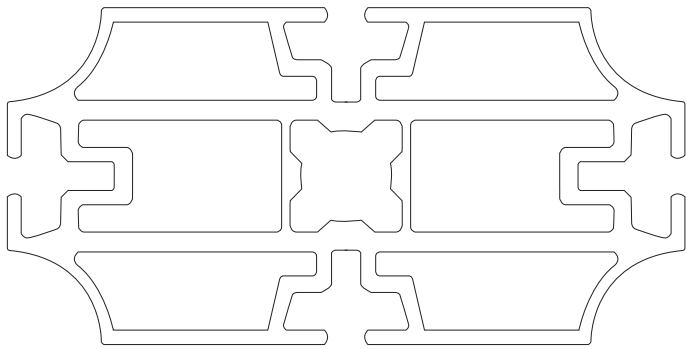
Section drawing of the extruded aluminium H-section, 1:1
